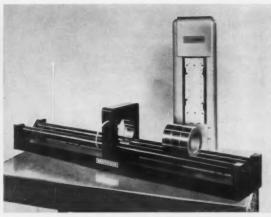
Machine control unit used on centerless grinder to gage bourrelet diameter of shells
